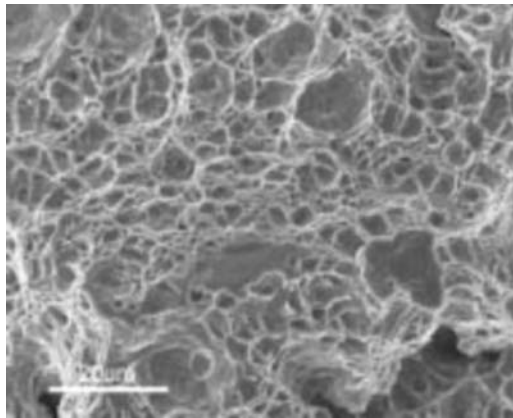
Ductile fracture surface at the center of the bolt¹
